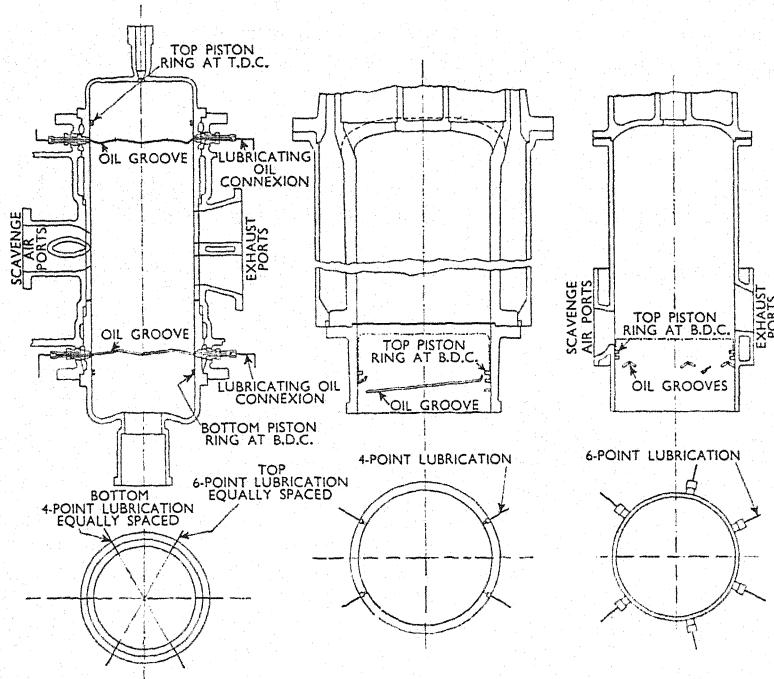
Types of Cylinder Lubrication (Scott Engines)
